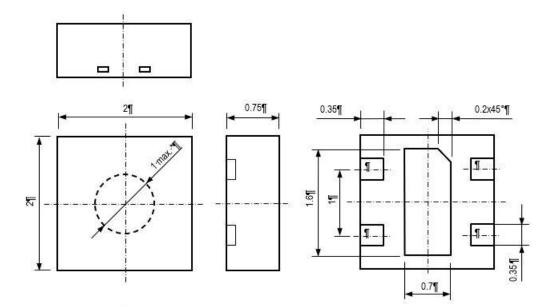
Dimensional drawing of the SHTC3 (units mm).
